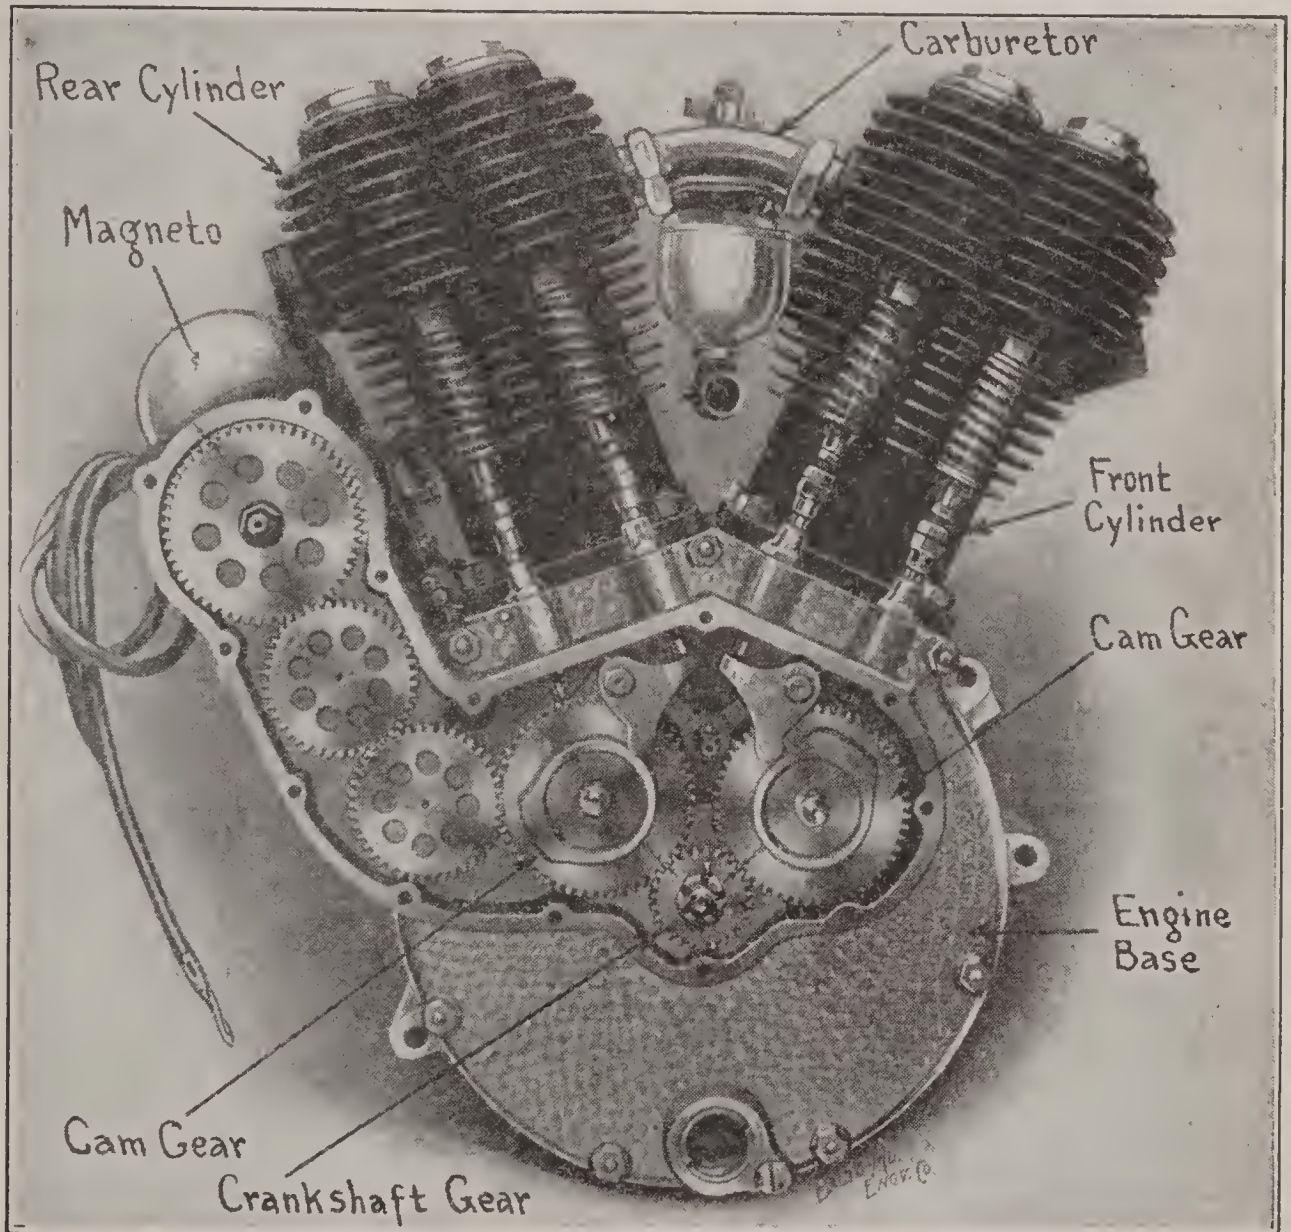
Reading-Standard Twin Cylinder Motor With Cover Removed From Timing Gearcase to Show Designs of Cams and Marks on Gears to Indicate Correct Setting as Determined by the Factory.
